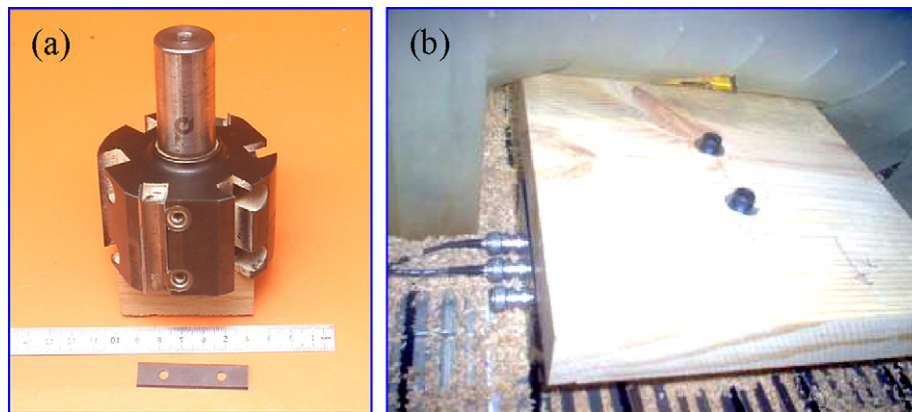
(a) Cutting Tool (80 mm diameter); (b) fixture of the sample on the Router table.
